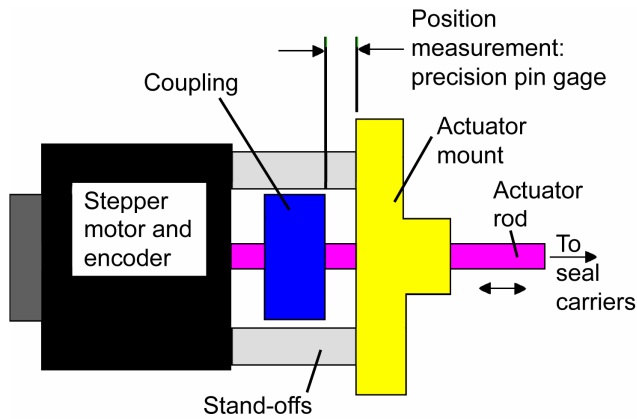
Stepper motor mounting arrangement showing means for measuring actuator shaft/coupling position relative to the actuator mount.
